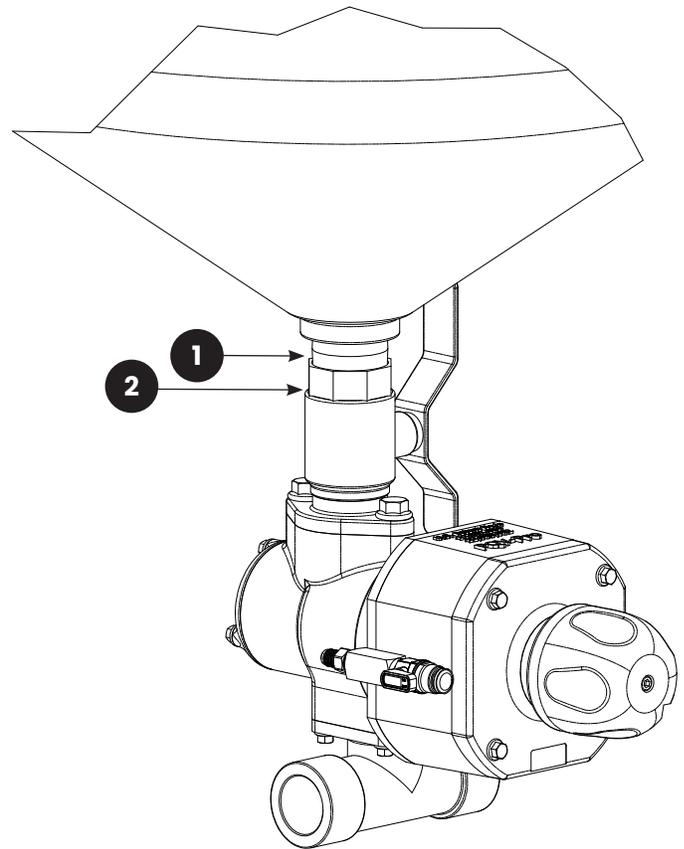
(1) 1.50" Installation Nipple; (2) Use wrench to tighten only on wrench flats
